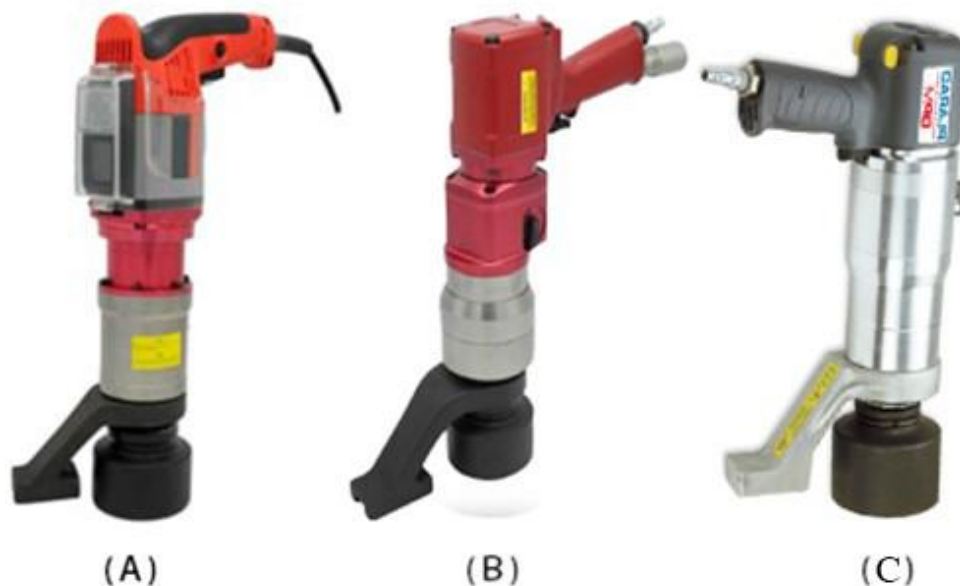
Three types of nut wrench: A) Electric; B) Hydraulic; C) Pneumatic engineering.
